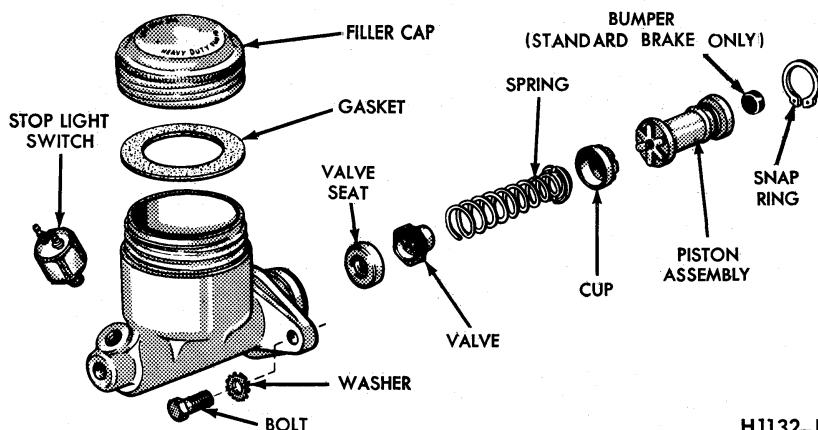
Typical B-, F-, N-, or T-Series Brake Master Cylinder—Cylindrical Reservoir
